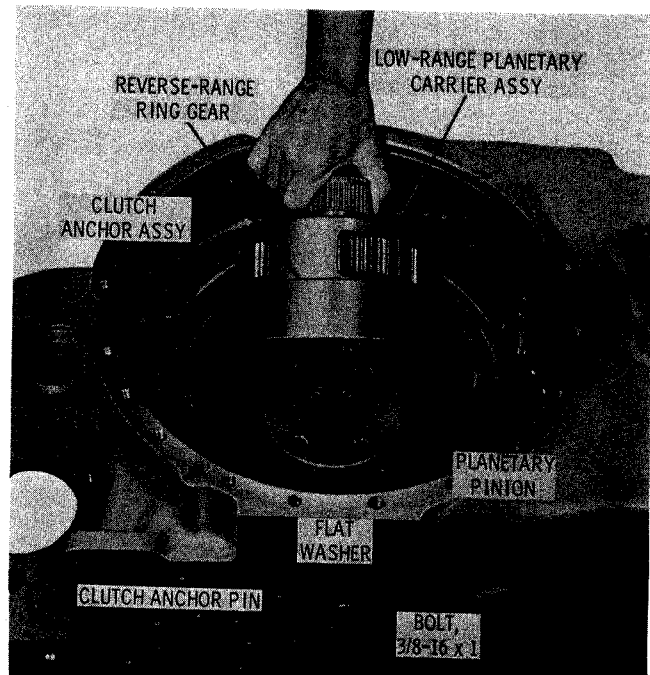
Installing low-range planetary carrier assembly with reverse ring gear
